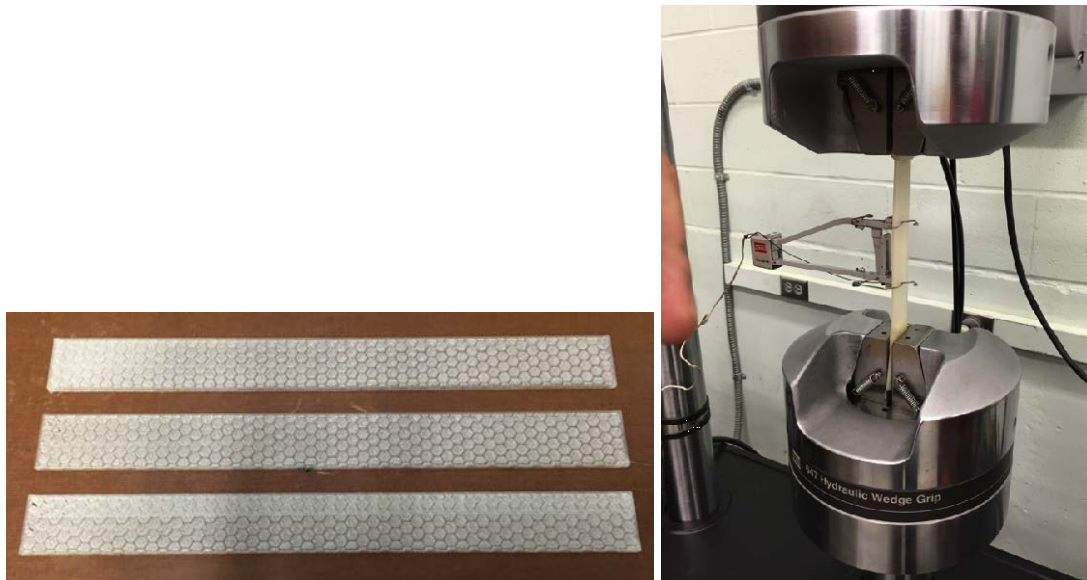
(Left) – 3 Samples on the print bed (Right) – Sample being tested
